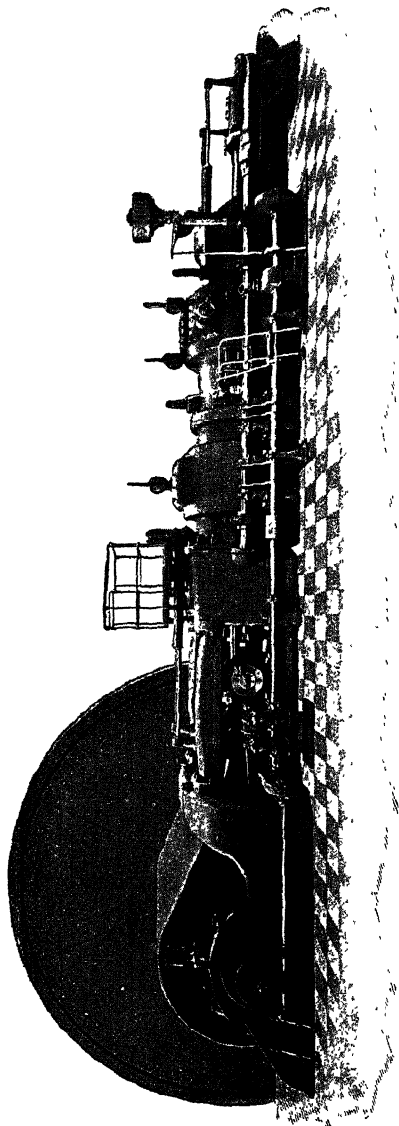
1,800-H.P. SINGLE-CYLINDER ENGINE OEGELHÄUSER SYSTEM, BY A. BORSIG, BERLIN.
